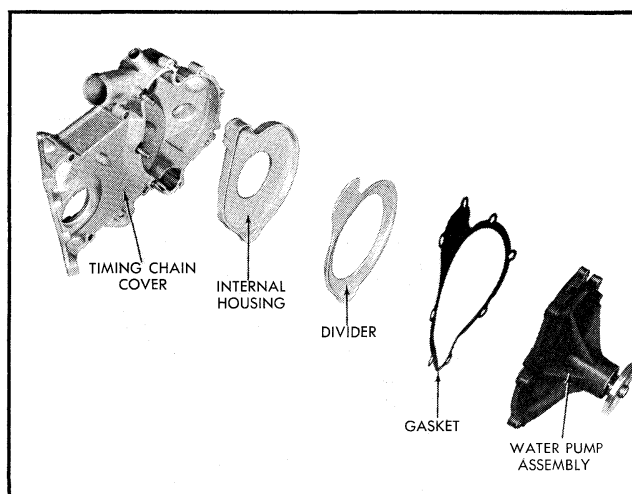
A-5 V-8 Water Pump Assembly and Timing Chain Cover Exploded View
